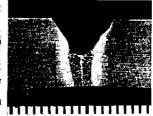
Bead surface and crater section after penetrant test showing no crack occurred during the FISCO crack test (9 mmt, 83 cm/min, 2 mm root gap)
